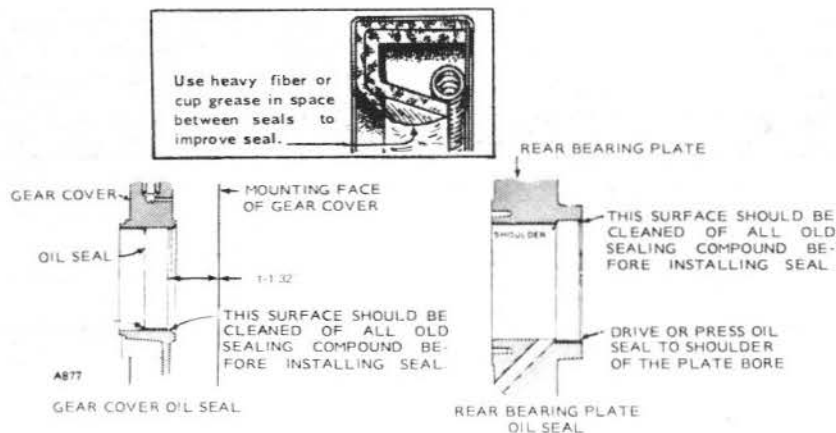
GEAR COVER AND REAR BEARING PLATE OIL SEALS
